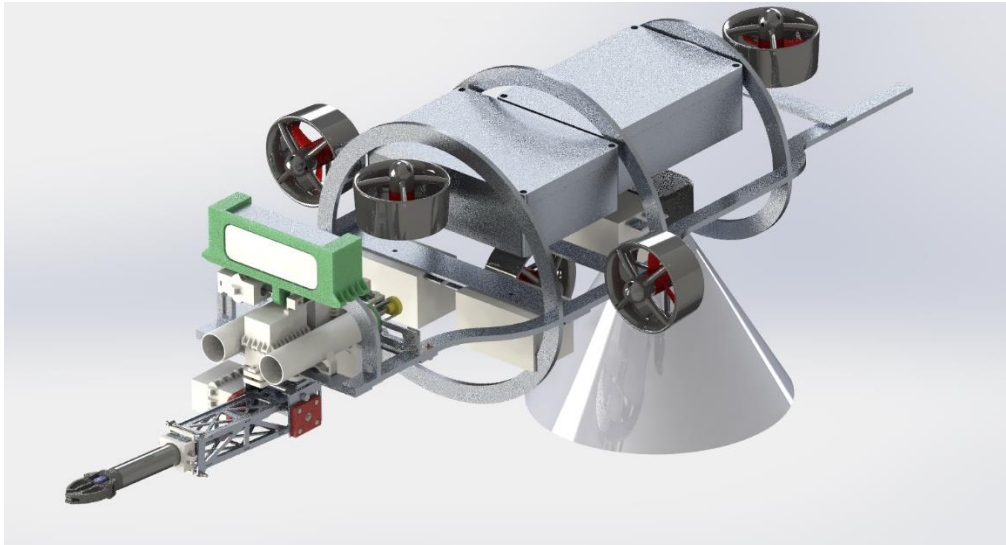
Initial CAD design of AUV's hull and interior with mounting for the outer shell
